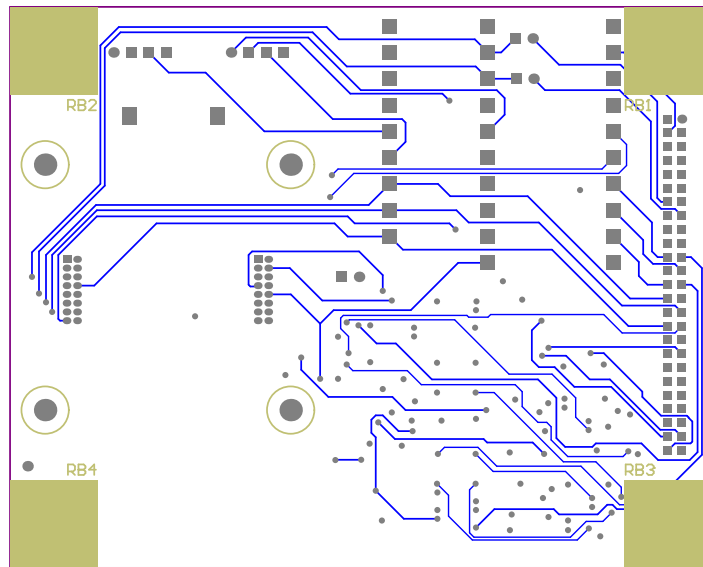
ASEK Angle Dual Channel Daughter Board Bottom Layout (TED-0003293)
